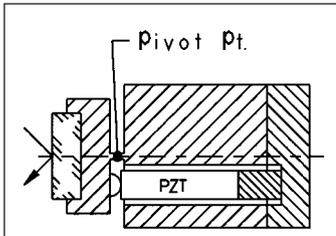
Single-flexure, single-piezo actuator tilt platform design
